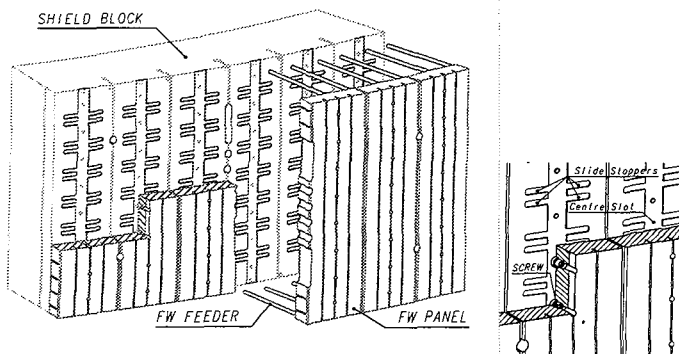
FW Panel/Shield Block Bolted at the Front Side of Shield Block
